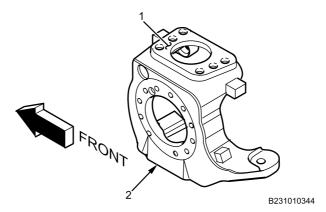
Inspecting Upper and Lower Bearing Surfaces of Steering Knuckle.
